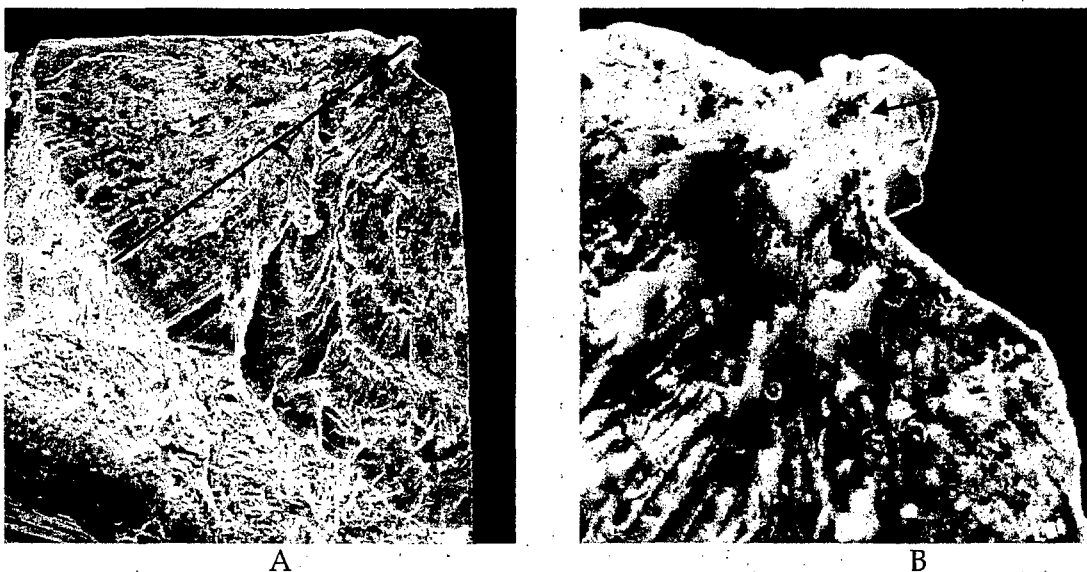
The crack profile and the initiation area of crack 1. Note that the initiation is associated with a lip caused by damage to the edge of the hole. The line shown in view A designates the approximate line followed during fractography. Cracking initiated in the lip (arrow).
